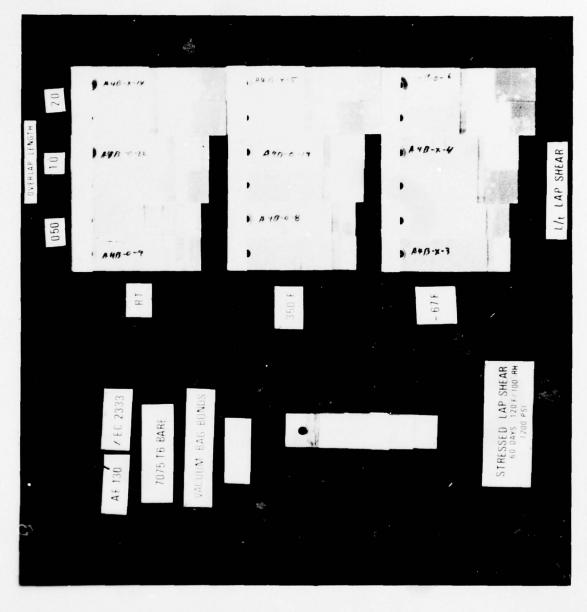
Specimen Failure Surfaces—AF 130, Optimized FPL Etch, Vacuum Bag Bonds
